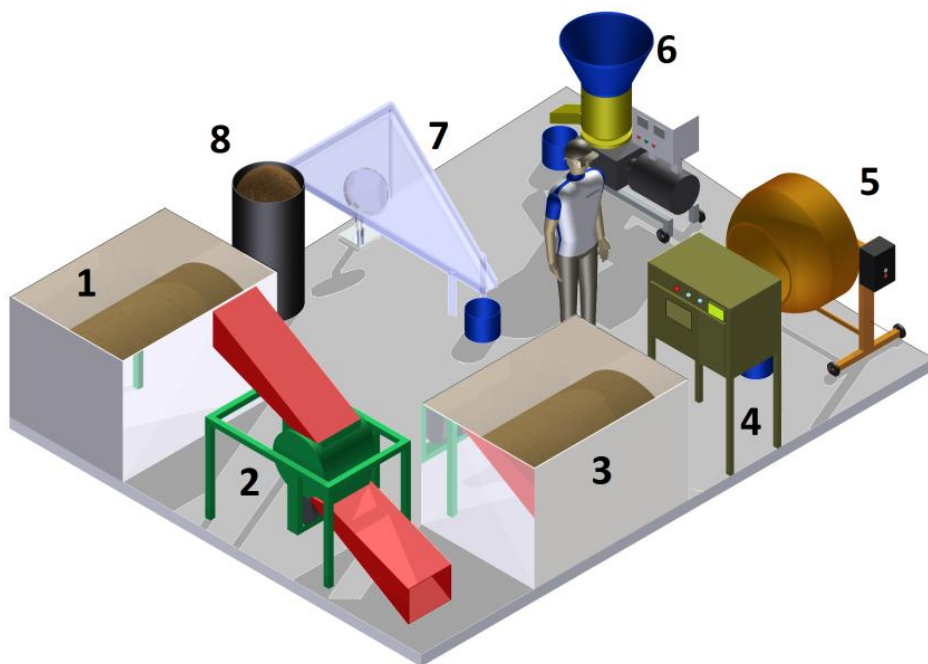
Experimental device for pelletizing: 1-input material tank, 2-crusher, 3- crushed material tank, 4- dryer, 5- mixing machine, 6- pellet mill, 7- cooler and duster with fan, 8- produced pellets tank
